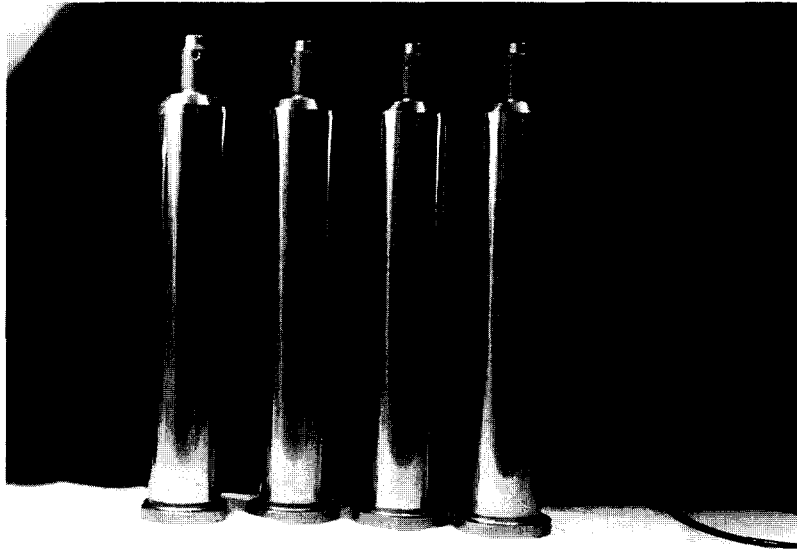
IAD of cadmium onto aircraft parts for corrosion protection.
